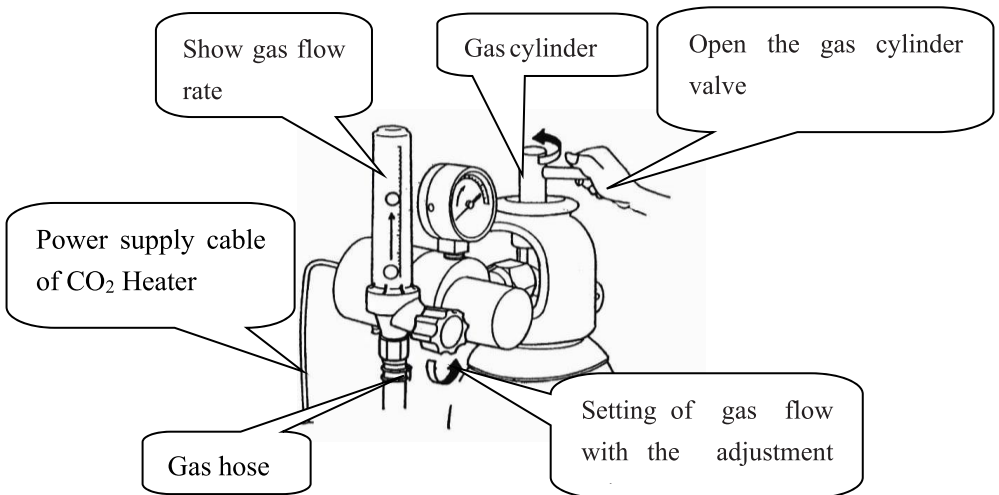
Open the gas valve and Setting of gas flow (for CO₂/MAG welding)
